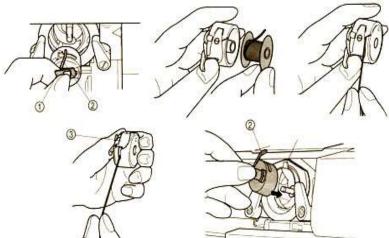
Scheme of tying the bottom thread on a sewing machine type 1022-M
